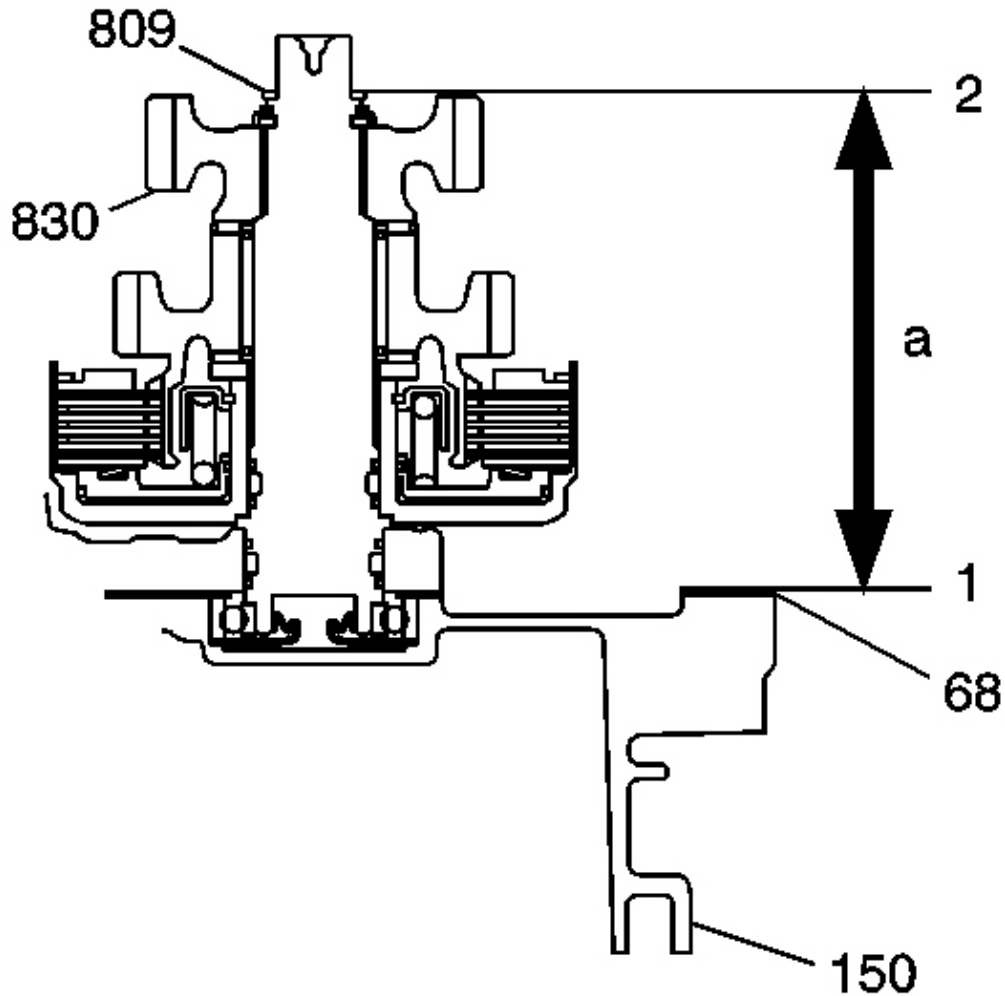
Measuring The Height Of The 3rd Clutch Shaft Assembly From Top Of Torque Converter Housing Gasket To Top Surface Of 3rd Clutch Shaft
